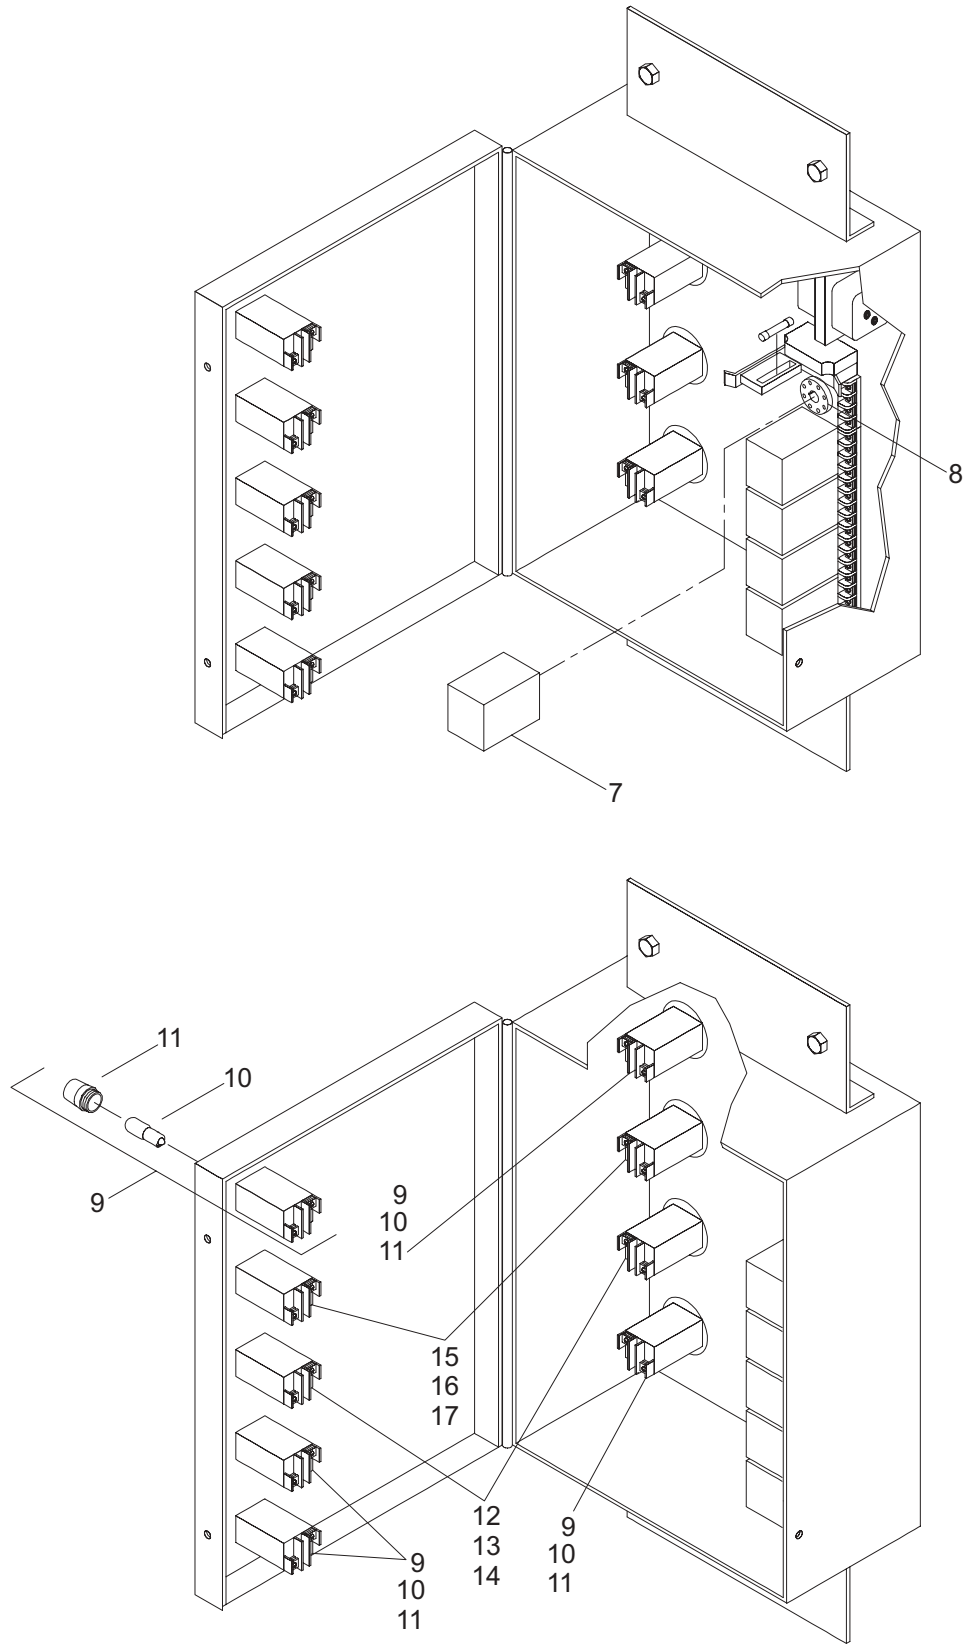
Fuel Level Indicating Panel (Sheet 2 of 2)
